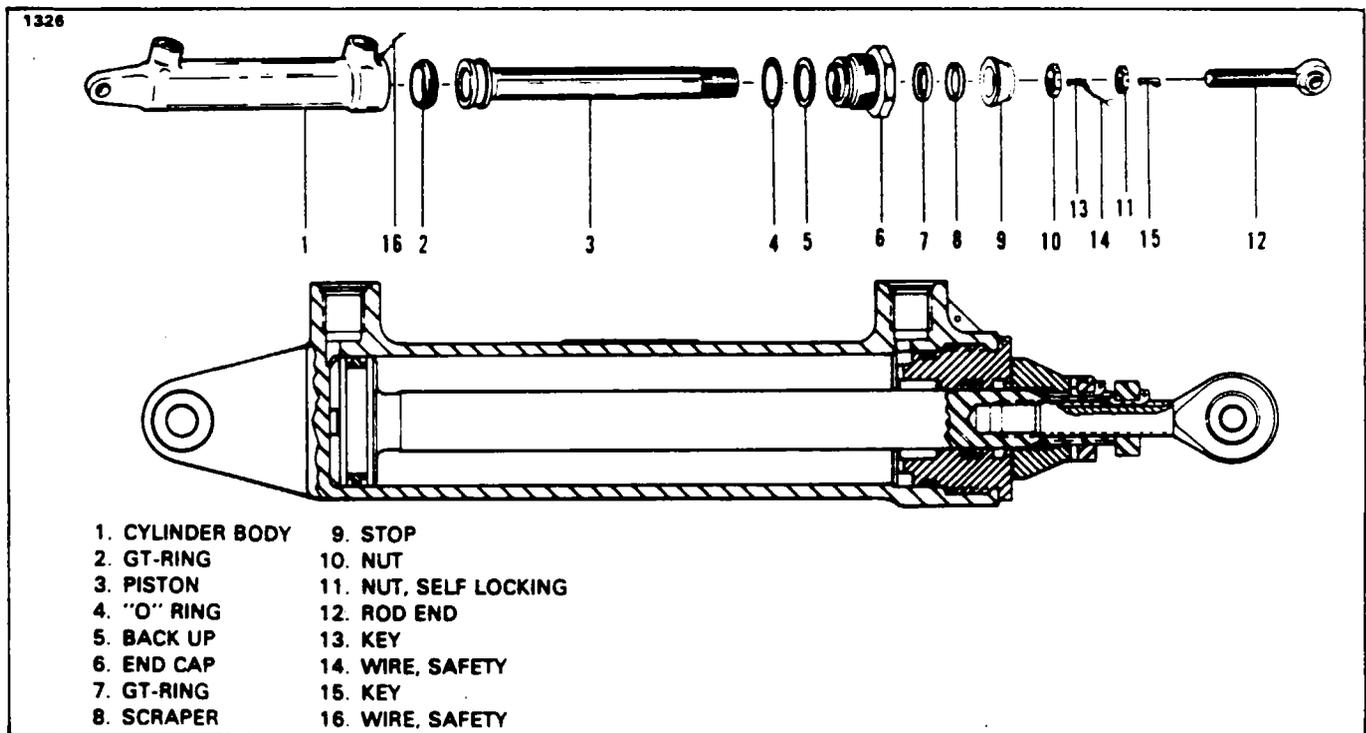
Gear Actuating Cylinder (Wiebel Tool WTC 2115-1)
